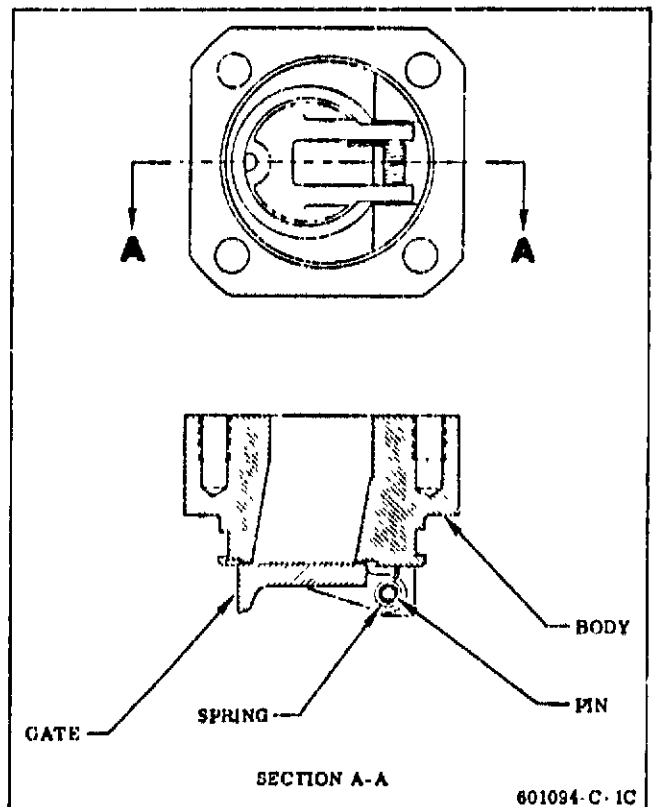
Engine Control Valve Check Valve--Cutaway View
